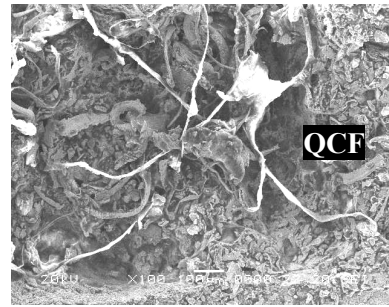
Fracture Morphology of As-Welded Specimen in the Weld Metal Region (QCF)
